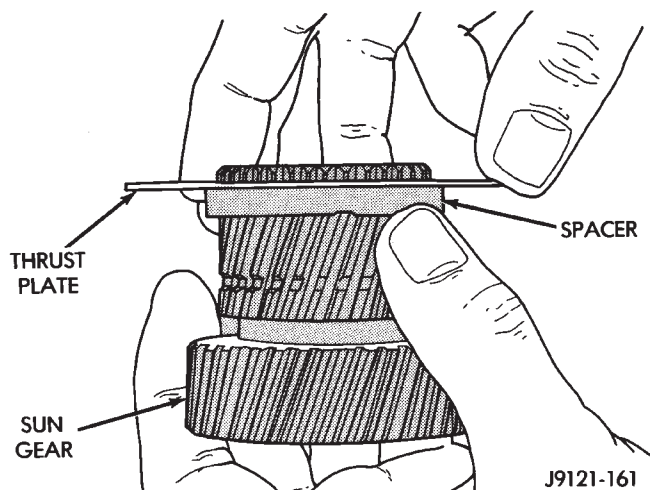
Installing Driving Shell Front Thrust Plate On Sun Gear
